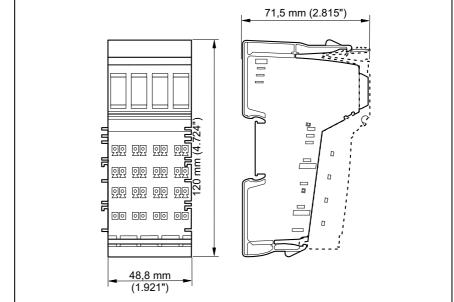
Dimensions of the electronic sockets (8-slot housing)
